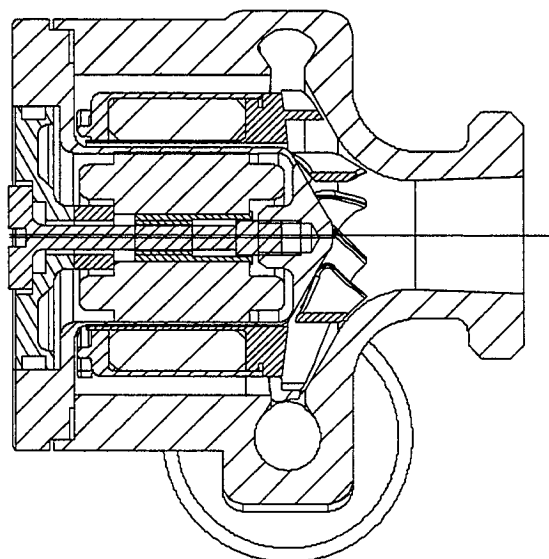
IVAS pump assembly featuring new primary impeller, shroud flowpath and volute.
